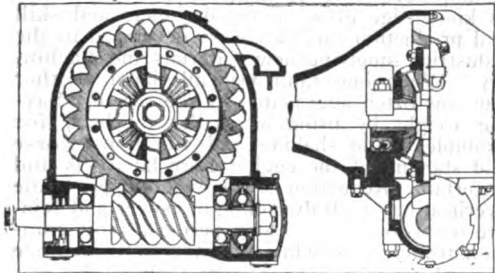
Worm gear for rear axle drive in motor trucks.
